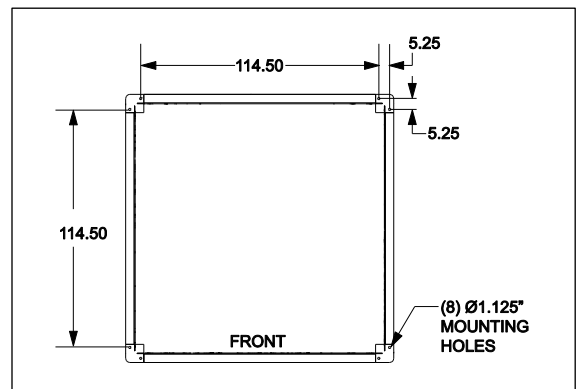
Mounting Hole Dimensions (in inches) Viewed from Above
